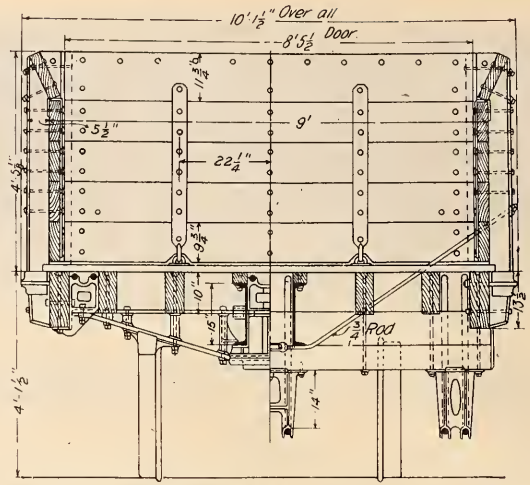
PART CROSS-SECTIONAL VIEWS, C., M. & ST. P. RY., COAL CAR.
